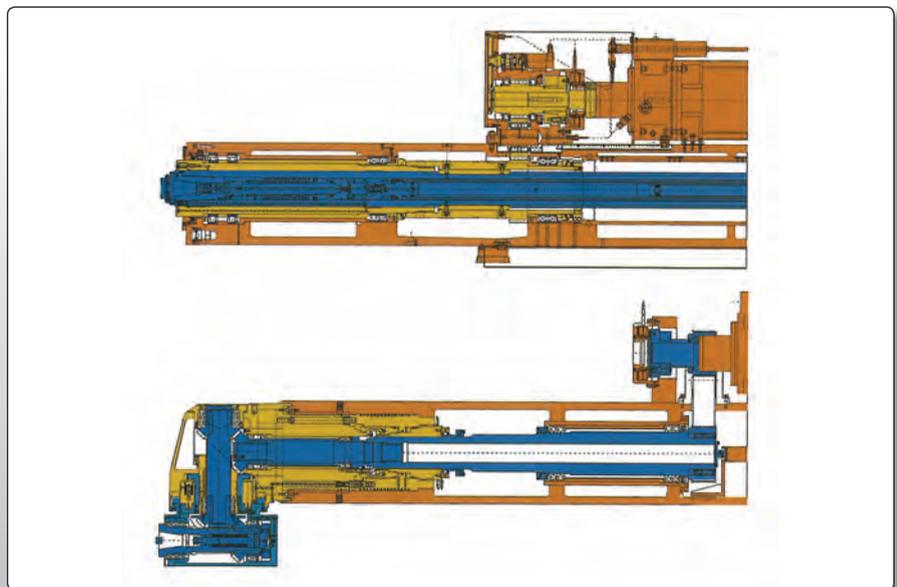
Example of the rotary tool drive and of the tailstock sleeve at the horizontal boring and milling machine [Škoda Machine Tool]
